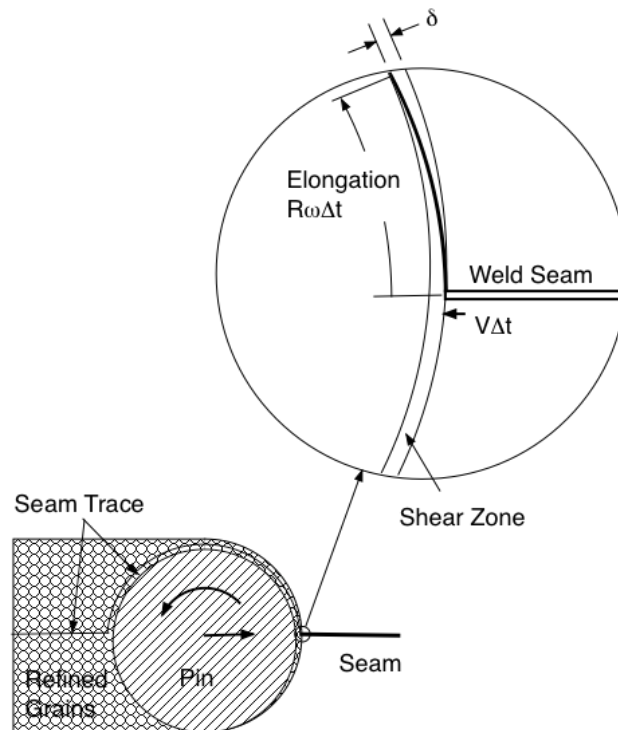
Analogy between friction stir welding and metal cutting
